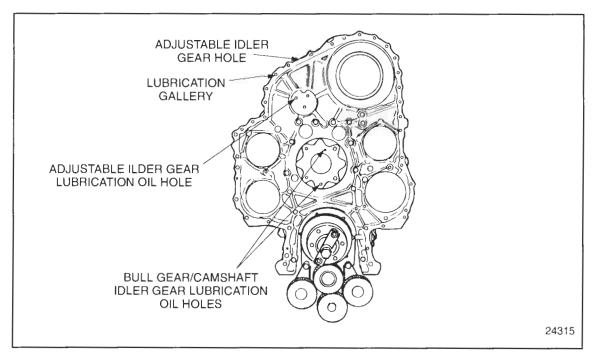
Bull Gear and Camshaft Idler Gear Lubricating Oil Hole Locations
